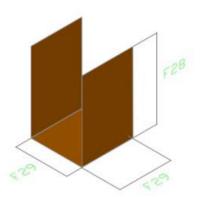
Fold the sheet metal to make the sides and bottom of the combustion chamber
